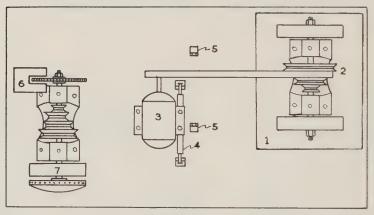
Top View of Work Table. 1, splash pan; 2, grinding arbor; 3, motor; 4, floating motor rail; 5, rests for second position of motor rail; 6, cut-off saw; 7, sanders. Splash guards are not shown in this drawing.
